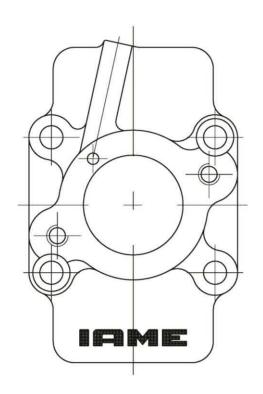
# PHOTO IDENTIFICATION CARBURETTOR INLET CONVEYOR
